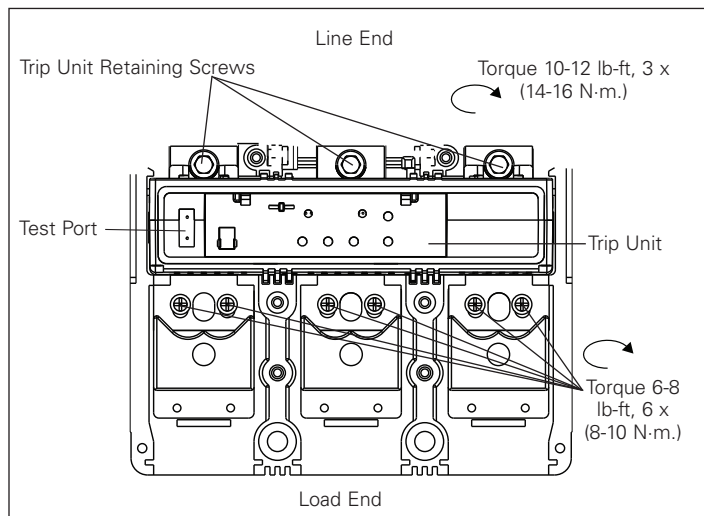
LES Trip Unit Mounting Screw Locations.
